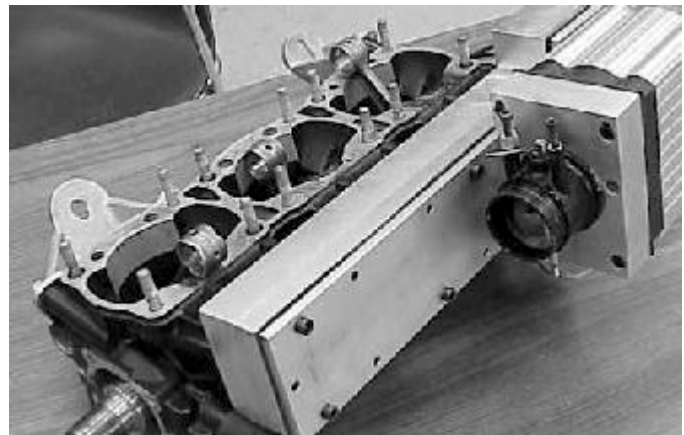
Air manifold, throttle body, and twin-screw scavenging blower
